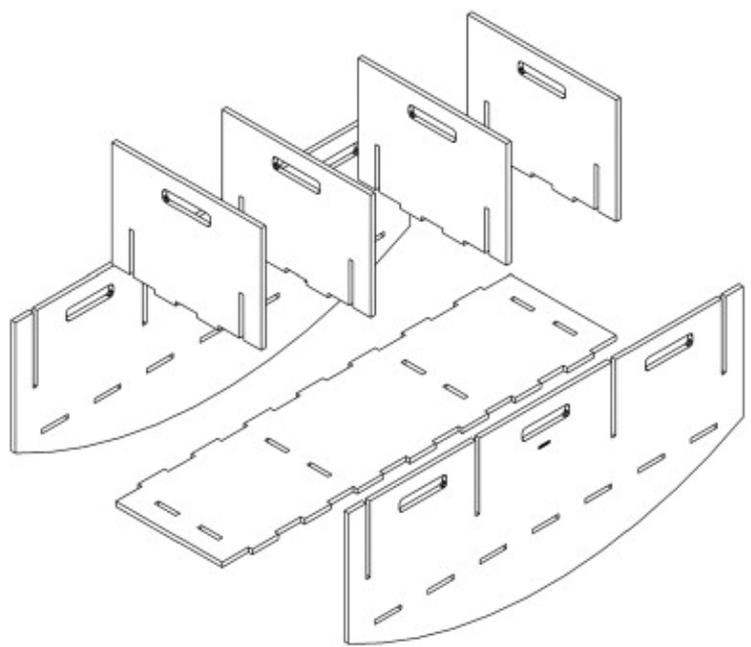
cradle rocker device exploded (Griffith et al., 2012)
